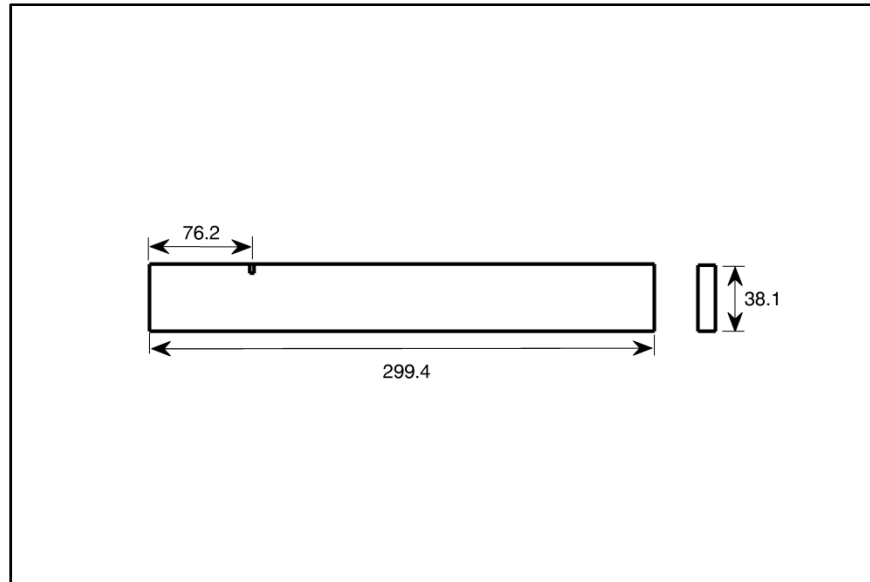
Schematic drawing of a test sample (units in mm)
